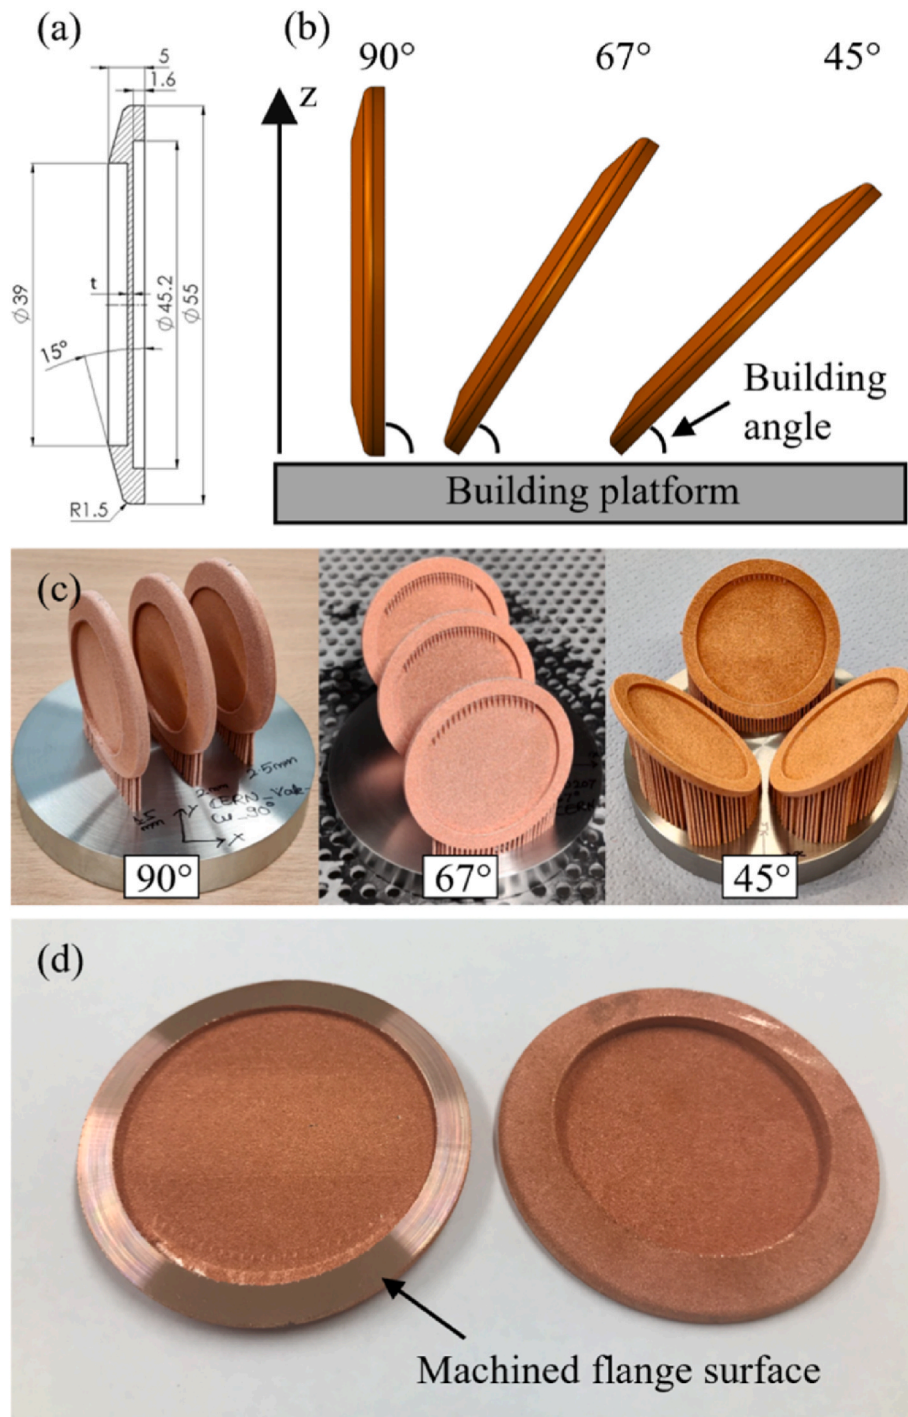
Membrane design with DN40 ISO-KF sealing flange (a), schematic of building orientations (b), and view of additively manufactured membranes on the building plate (c) and after flange surface machining (d).
